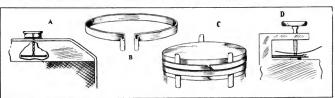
Some Hints for Operators: A, Safety Device to Prevent Loss of Radiator Capt B, Piston Hing Ciamp; C, I fillising Old Hacksaw Blades to Remove Piston Rings; D, Truing 1 p Call Points with Emery Paper,
